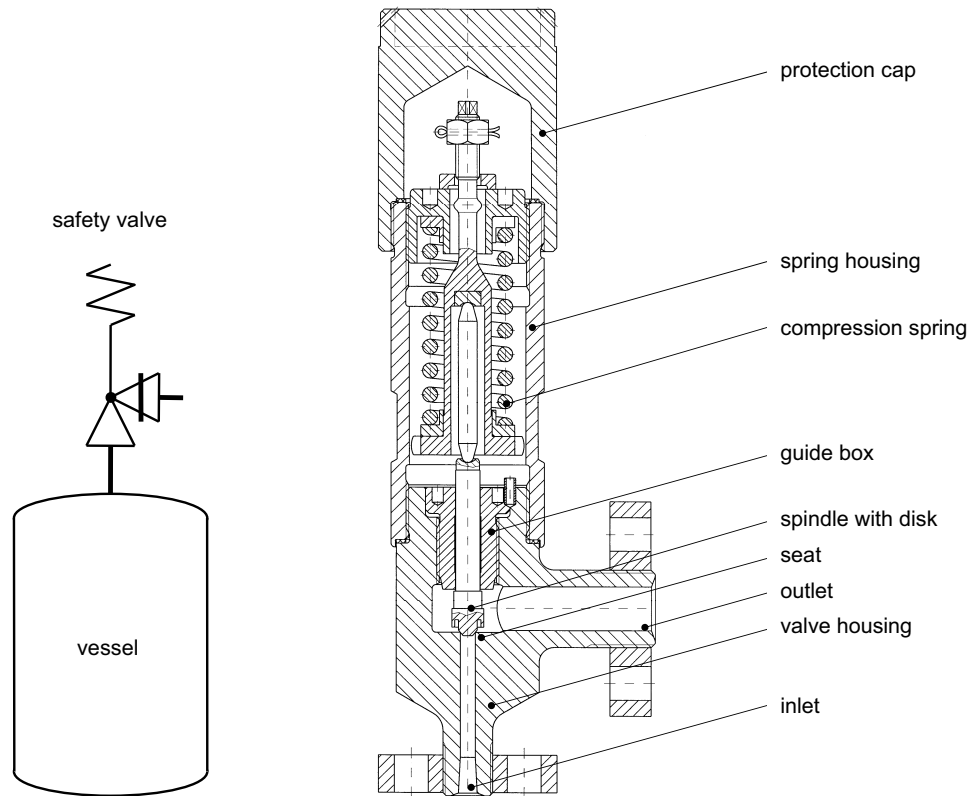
Schematic setup and construction drawing of a safety valve.
